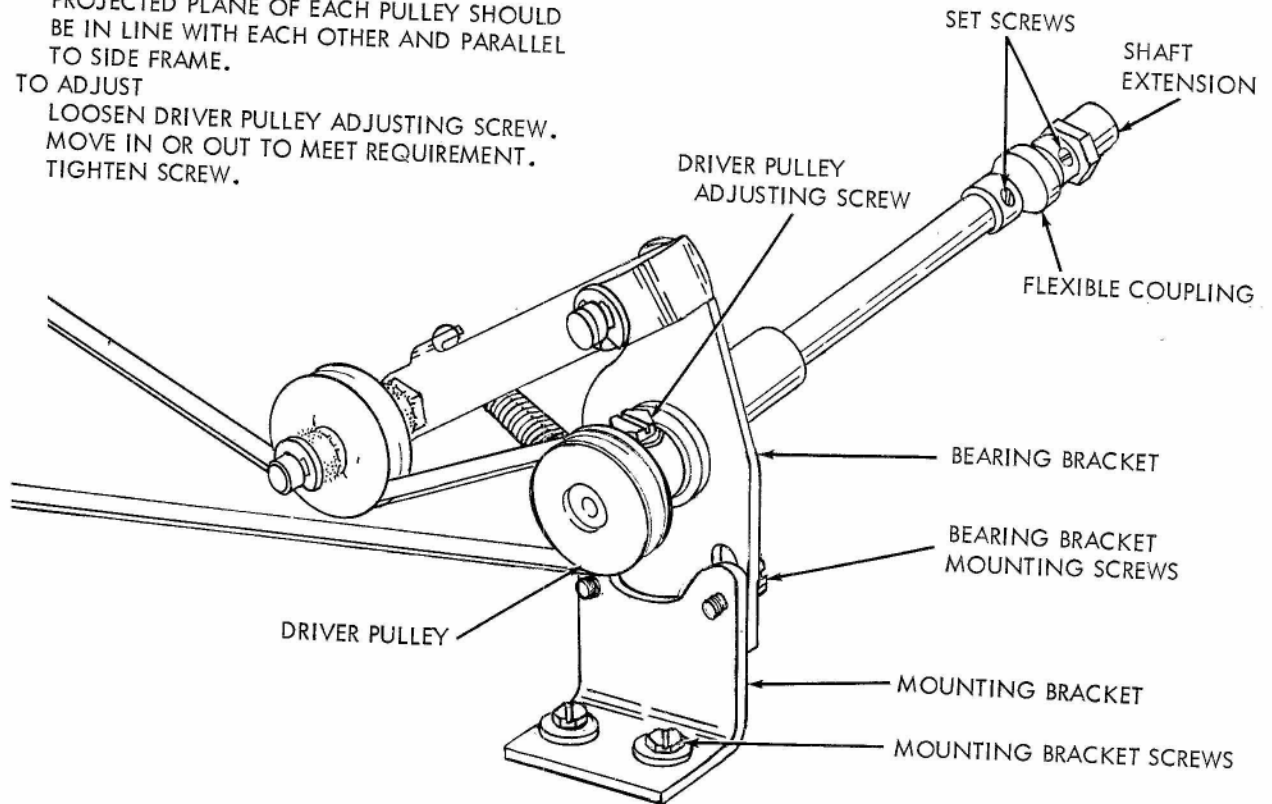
PAPER WINDER (FOR MULTIPLE MOUNTED PAGE PRINTERS)
